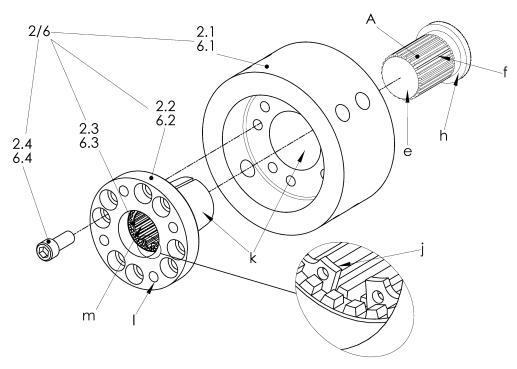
Mounting the CENTA-conical clamping hub (2/6)
